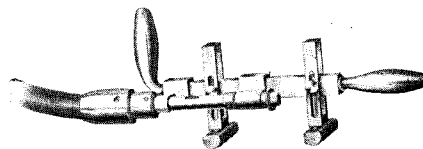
MOTOR OPERATED SLOTTING TOOLS
